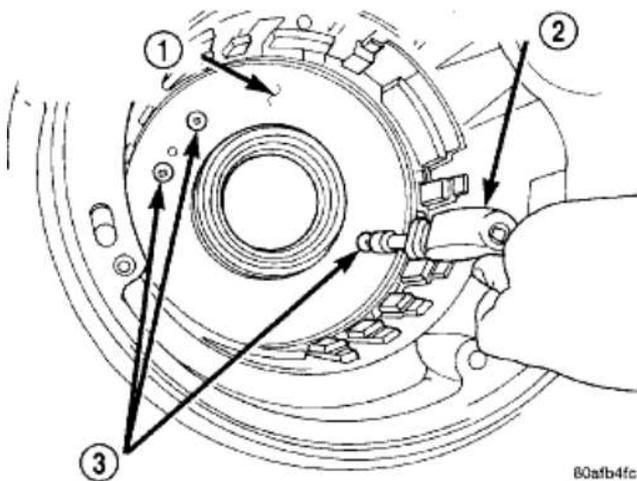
Removing/Installing Low/Reverse Piston Retainer-To-Case Screws
